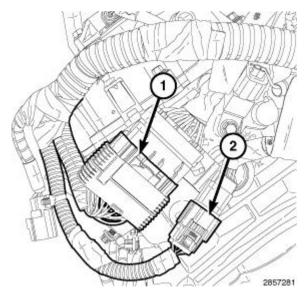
Engine Injection/Ignition Harness & Engine Oil Pressure/Temperature Harness Courtesy of CHRYSLER GROUP, LLC
